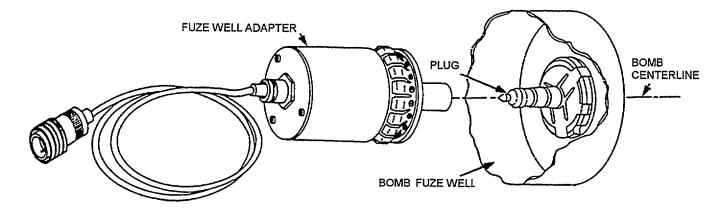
F. Fuze Well Adapter/Nose Fuze Well Plug Interface
